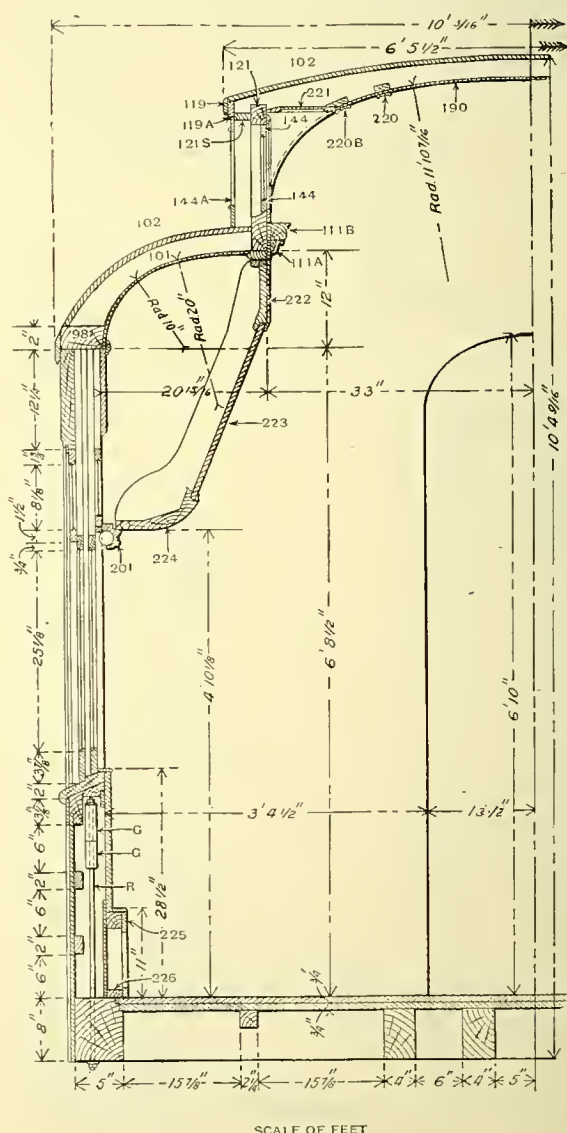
Cross Section of Side and Roof and Upper Berth of a Sleeping Car.
